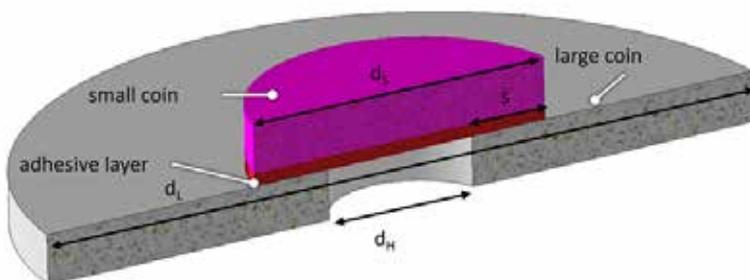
• Sectional view of a coin specimen for measuring hydrogen tightness. (Source: ifs TU Braunschweig)
